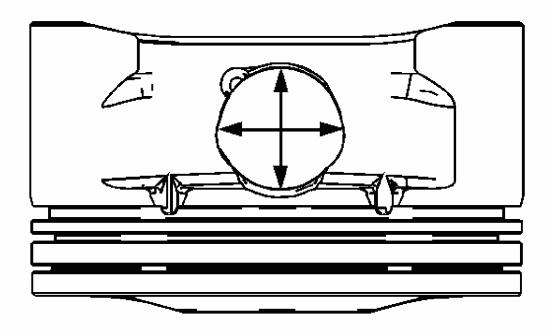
Measuring Piston Pin Bore Courtesy of GENERAL MOTORS CORP.
